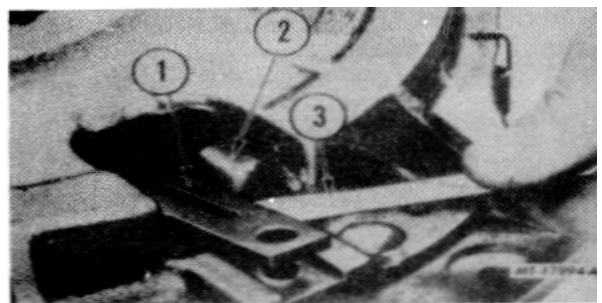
Removing Adjusting Ring Lock (Dana Clutch) (Manual Adjustment Type)
